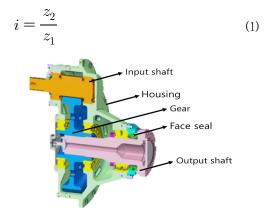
Schematic Drawing of Final Drive for Tracked Vehicle
